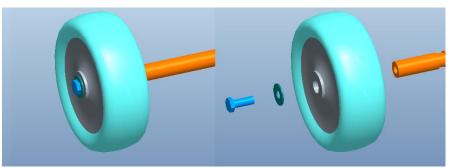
Representing the fixing of the wheel on the bar. Left image shows the assembled view. The right side image shows all the components in an exploded view style.
